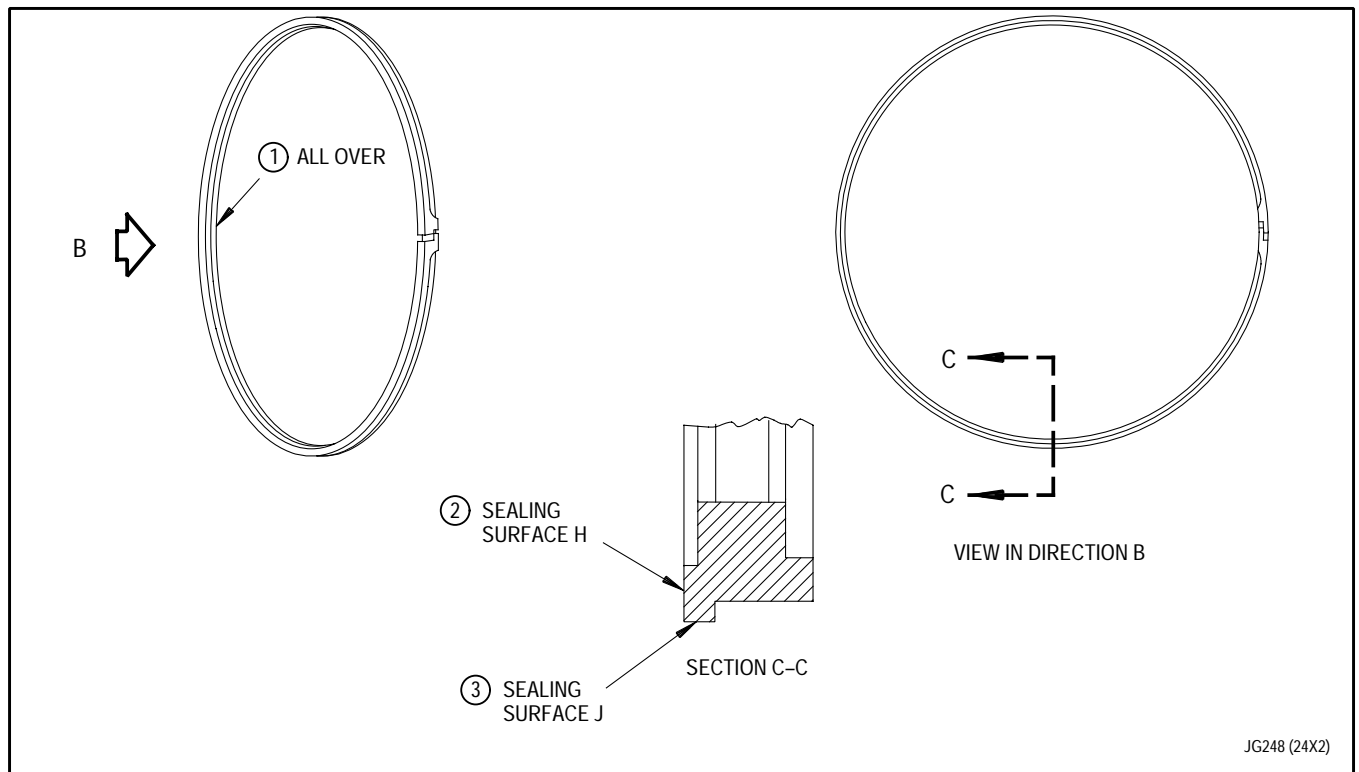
Metal Seal Ring (No. 4 Bearing Seal Sealing Ring) - Inspection
